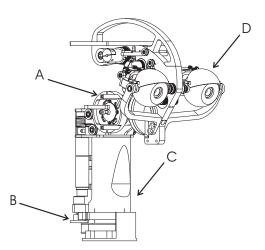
Mechanical drawing of Domo's active vision head. A SEA actuator driven universal joint (B) combined with head pan (C) provides a compact ball-and-socket like three DOF neck. The upper neck provides roll and tilt through a cable-drive differential (A). Two FireWire CCD cameras (D) share a single tilt DOF and have two independent pan DOF. Expressive eyelids provide a final DOF.
